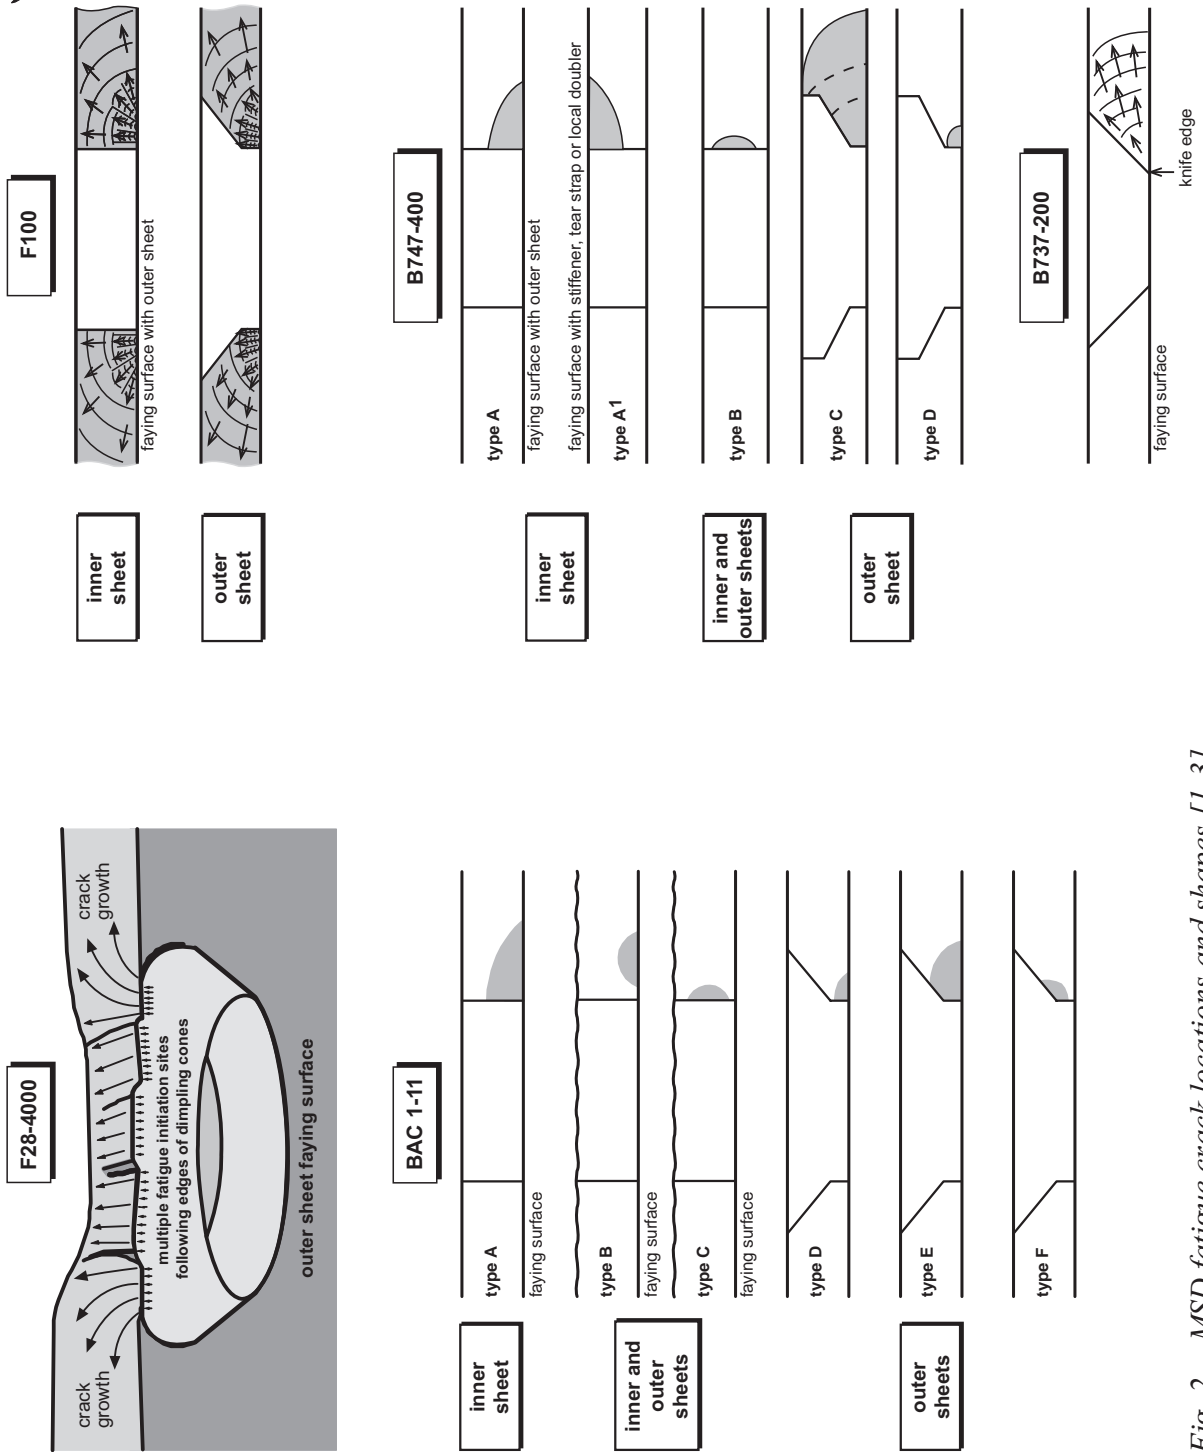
MSD fatigue crack locations and shapes [1-3]
